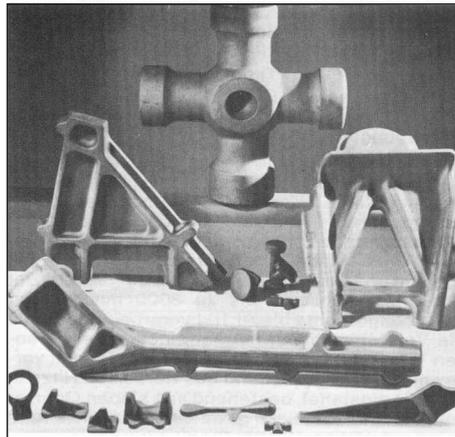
COMPONENTS OF TITANIUM ALLOYS PRODUCED BY CLOSED DIE FORGING
